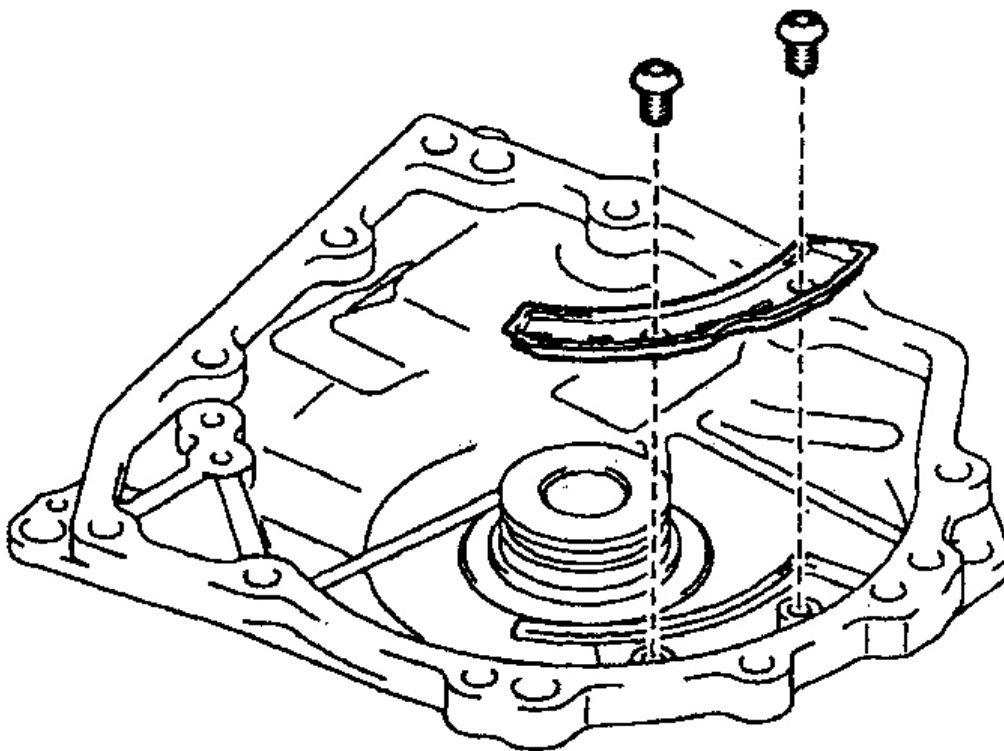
Exploded View Of Transaxle Internal Components (2 Of 2)
